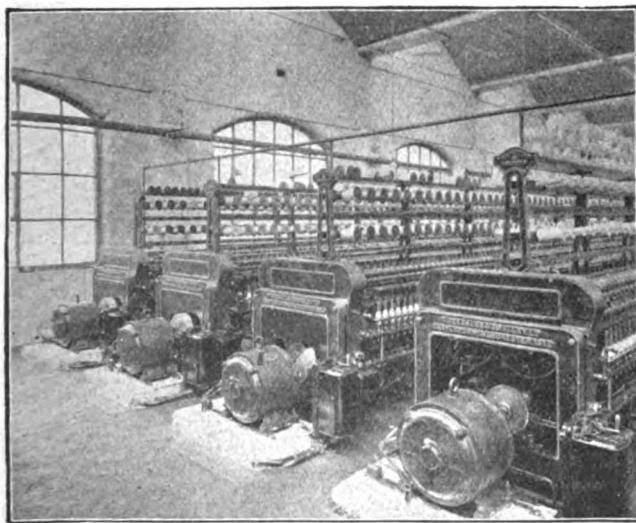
DETAILED VIEW OF THE MOTORS AND STARTING SWITCH-GEAR, SHOWING COVERS REMOVED FROM THE GEARS.
